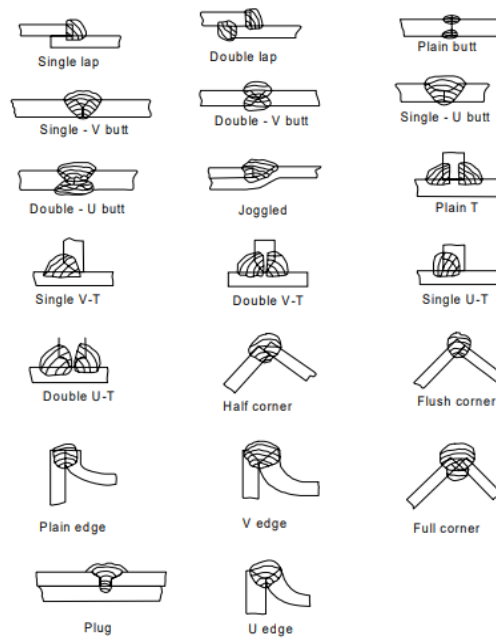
Shows Welding Joints(wordpress.com).
